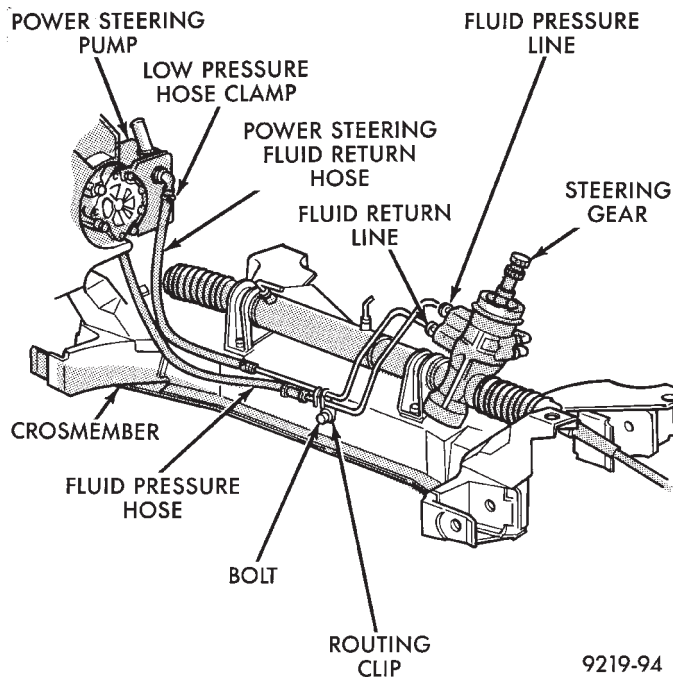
Power Steering Hose Routing 2.2 & 2.5L
